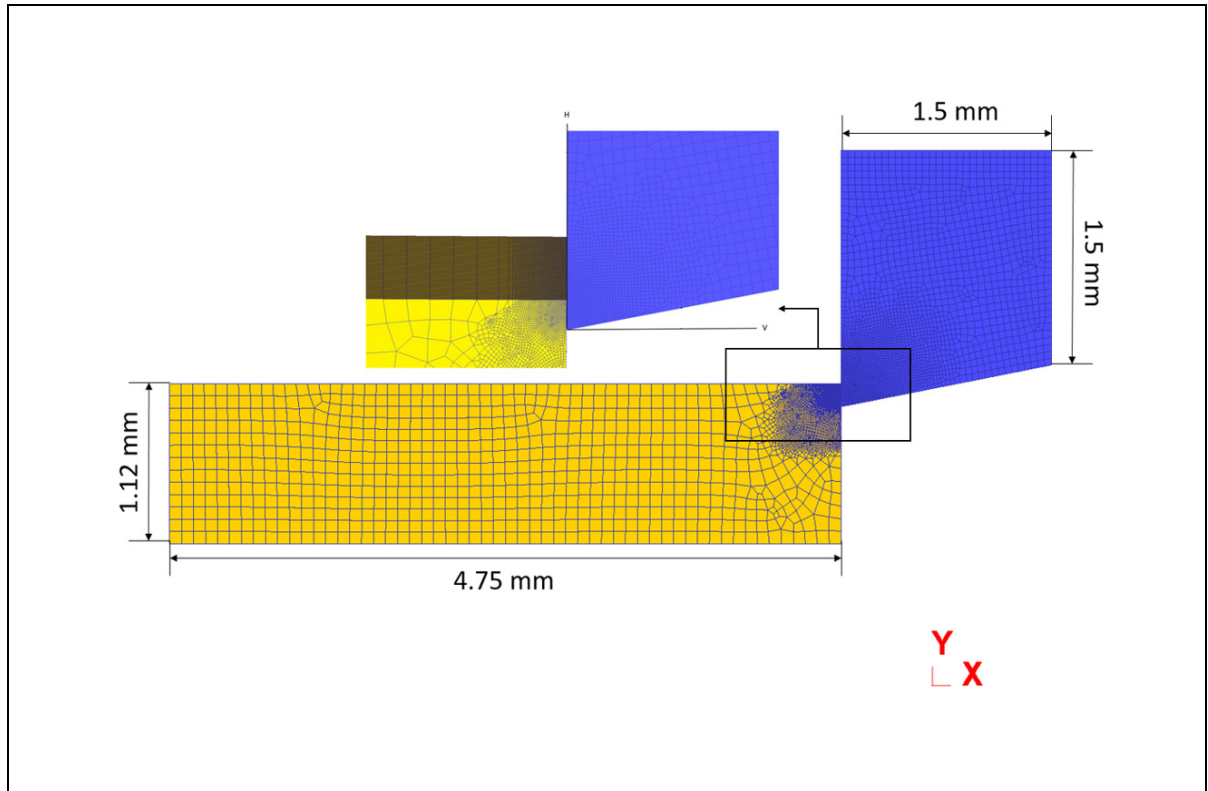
The geometry and dimensions of the tool and workpiece in FE modeling
